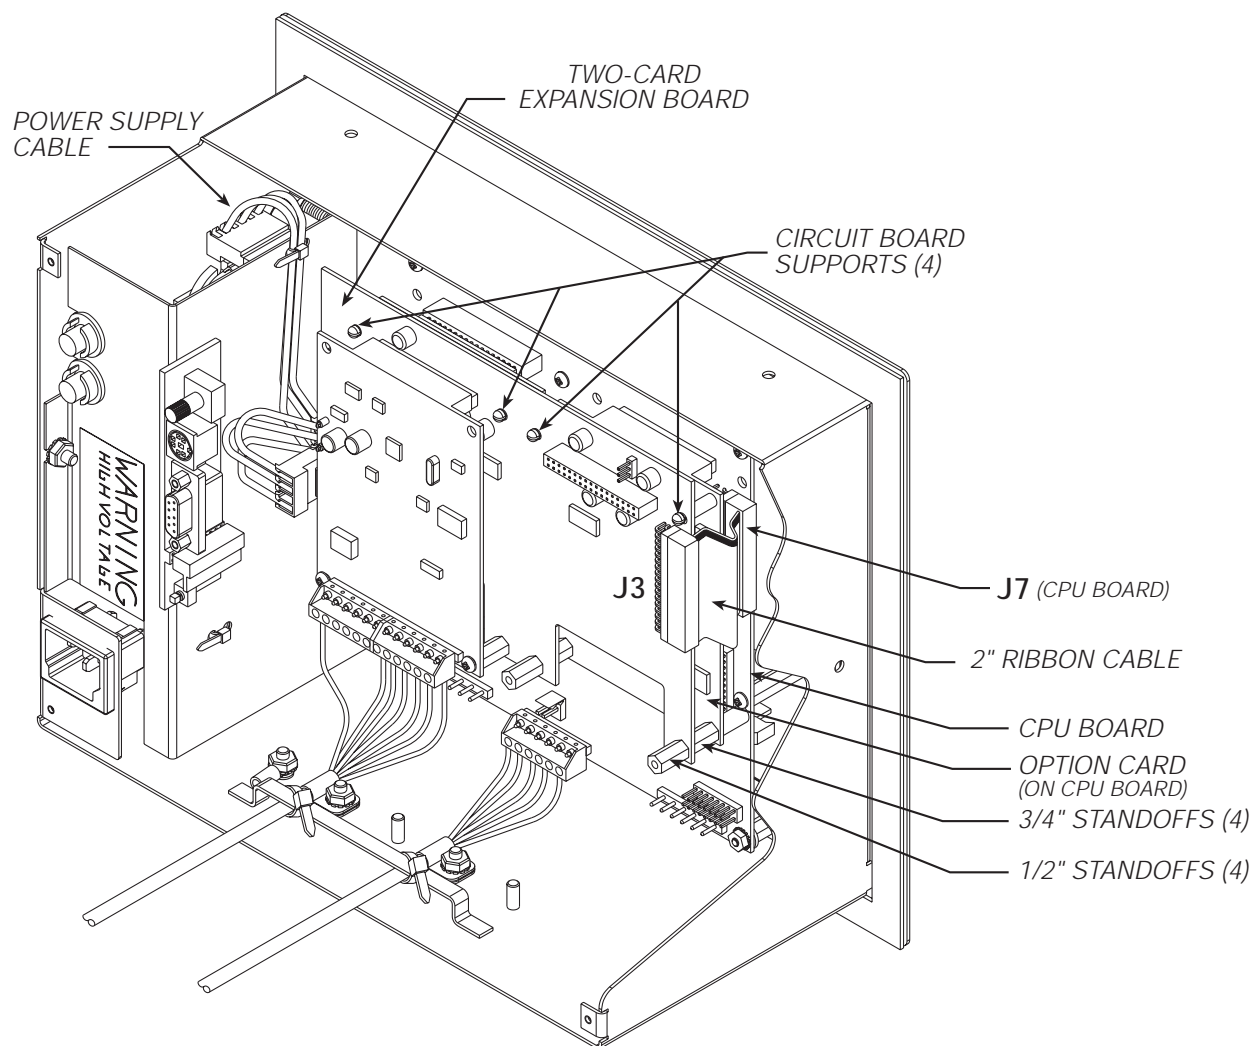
Two-Card Expansion Board Installed in Panel Mount Enclosure
